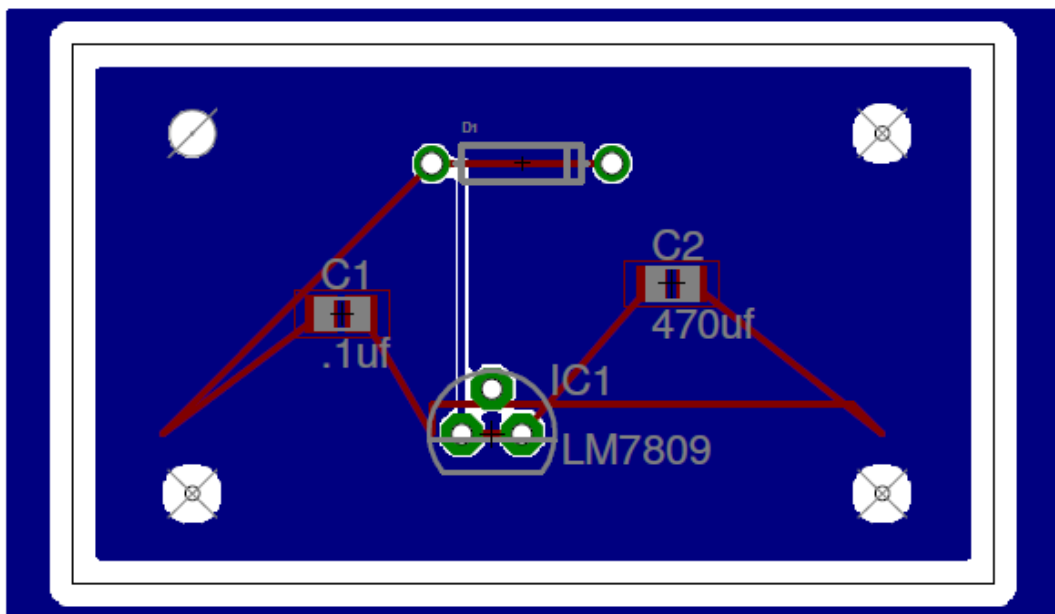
PCB Layout for Microcontroller Voltage Regulator
